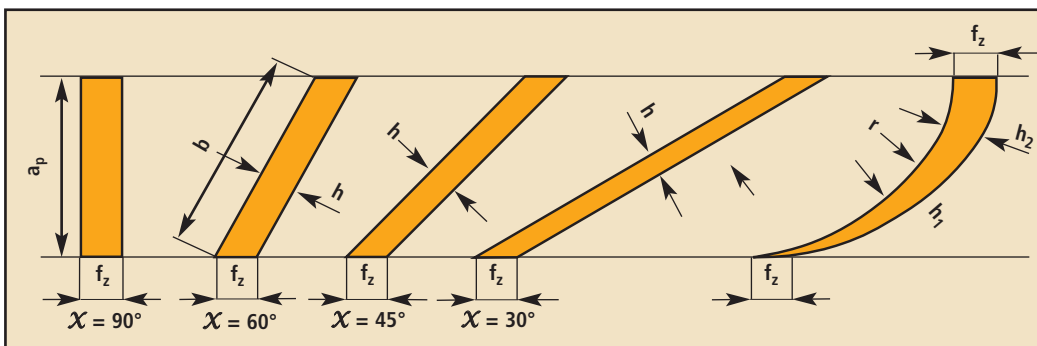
Shapes of the cutting sections for tools with various approach angles, from a 90° insert on the left to a round insert on the right. a_p = DOC; b = chip length; f_z = feed per tooth; h = chip thickness; r = radius; \mathcal{X} = approach angle.
